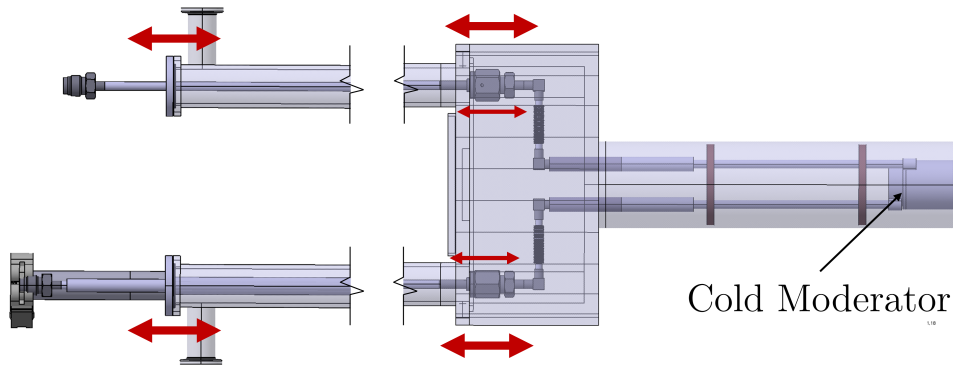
Cut CAD view of the bolted and aluminum-sealed flange connection at the interface between transfer line (TL) and cold moderator (CM) section.
